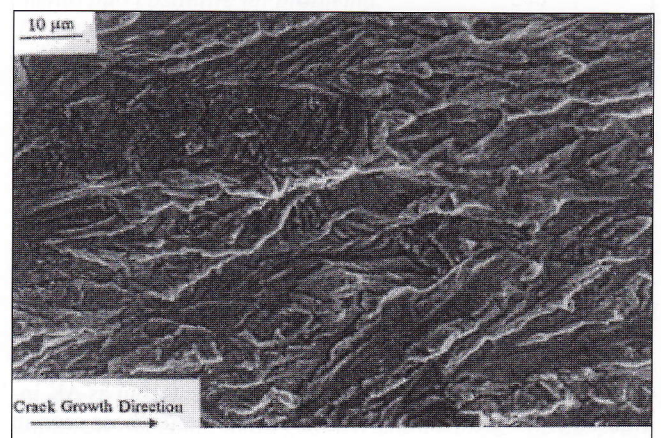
Fracture Surface Appearance when Tested in Air.
